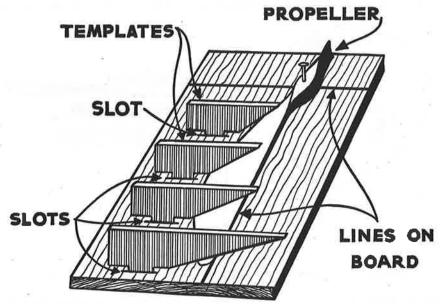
TRUE-PITCH PROPELLER PLATFORM ASSEMBLY
